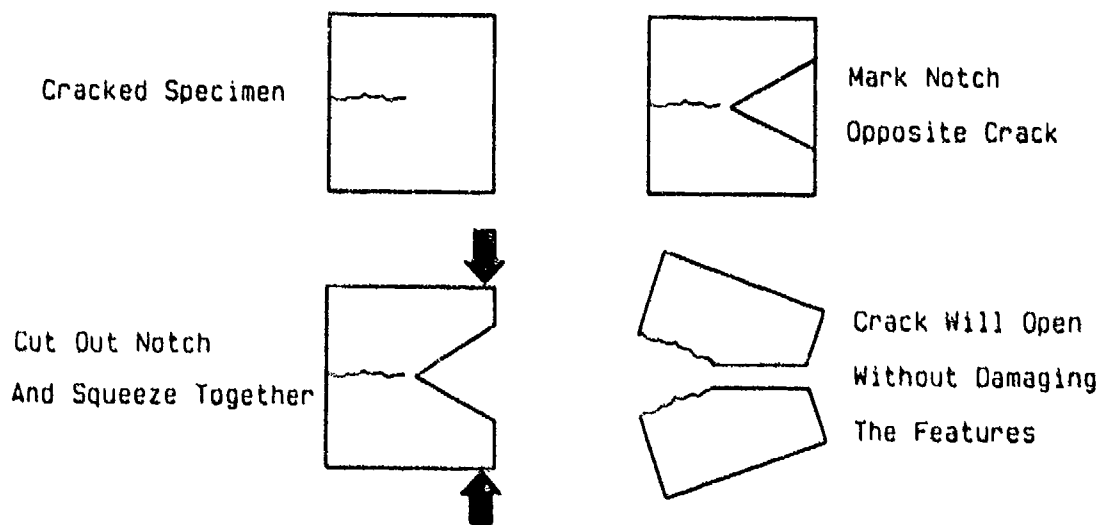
Schematic showing technique for opening a crack without damaging surface features. The extent of the crack is estimated and a V-shaped notch is drawn on the side opposite the crack. The notch is then cut out and the two halves are squeezed together to open the crack.
